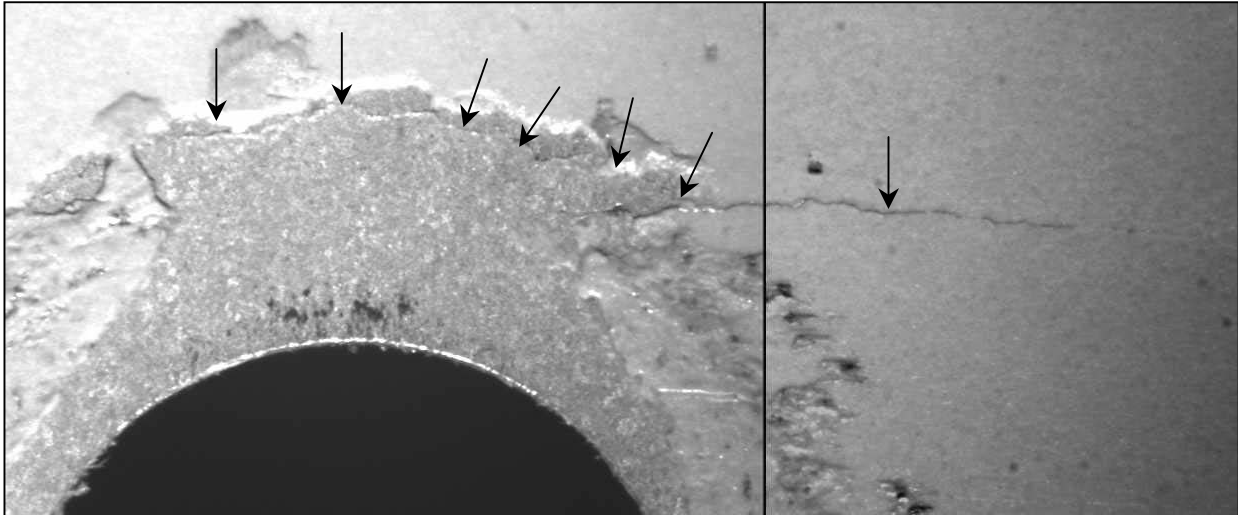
Specimen 2-A-4, fatigue crack around hole, fretting fatigue
